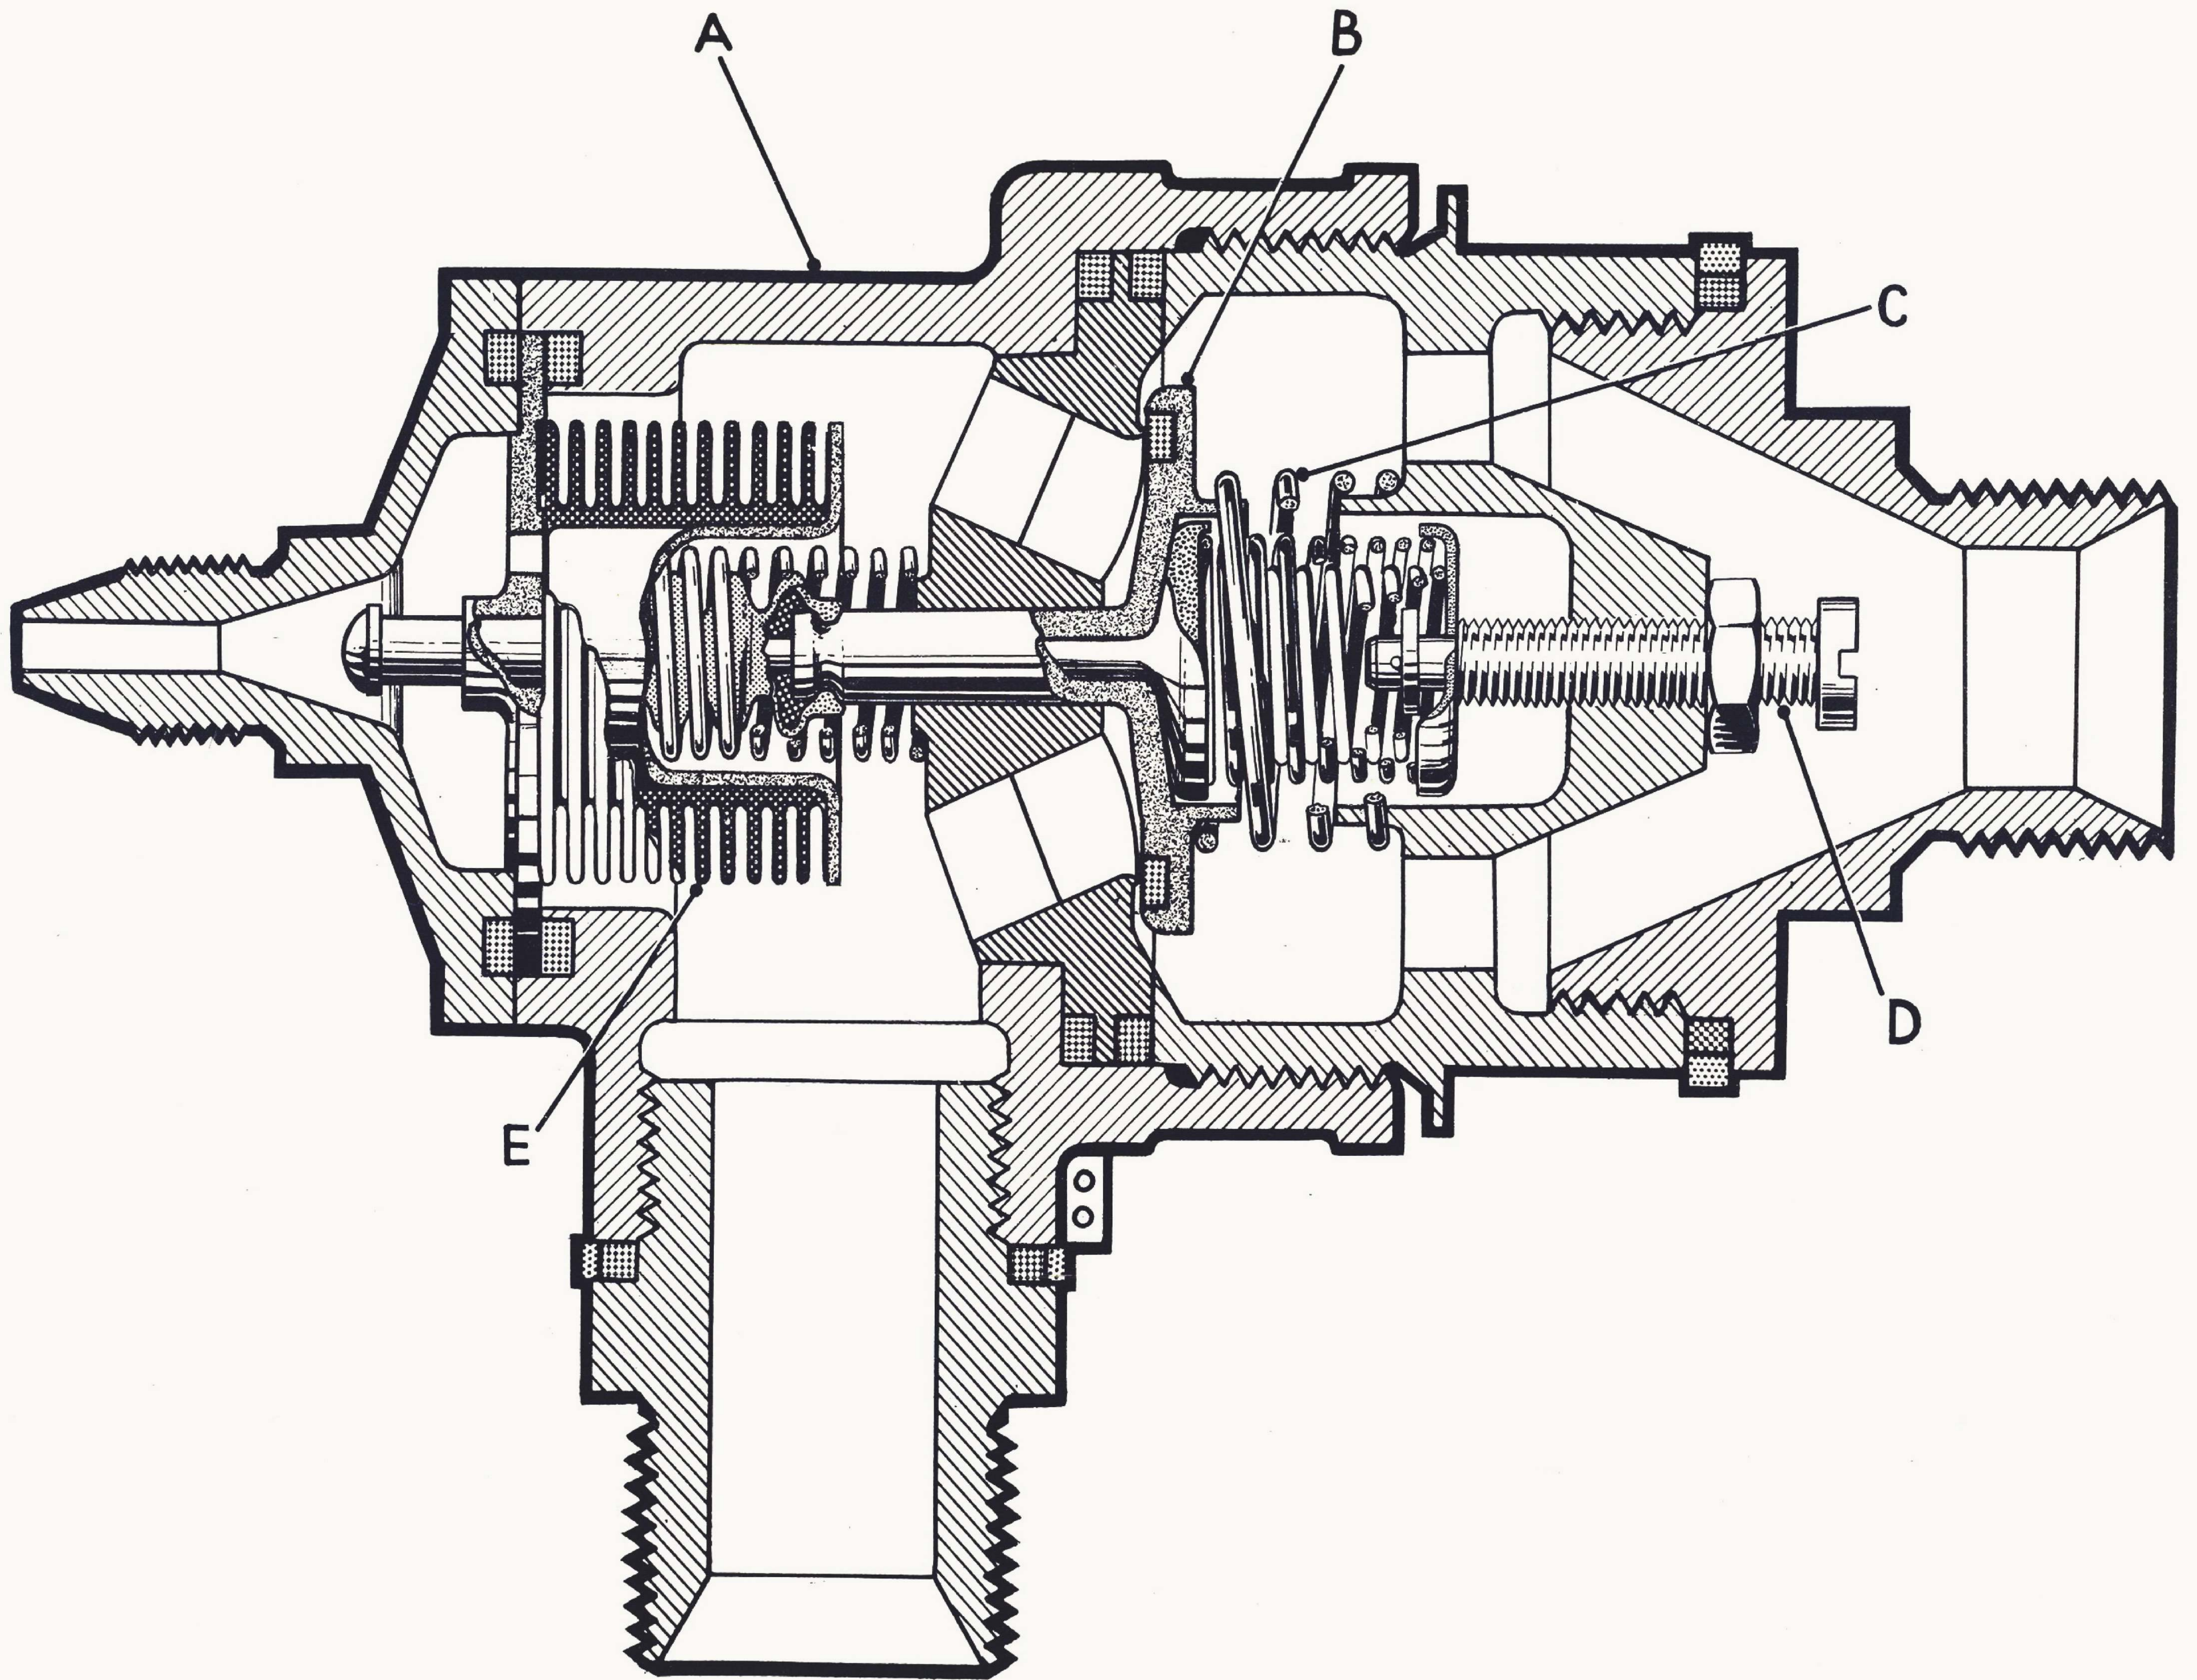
WING TANK PRESSURE RELIEF VALVE
